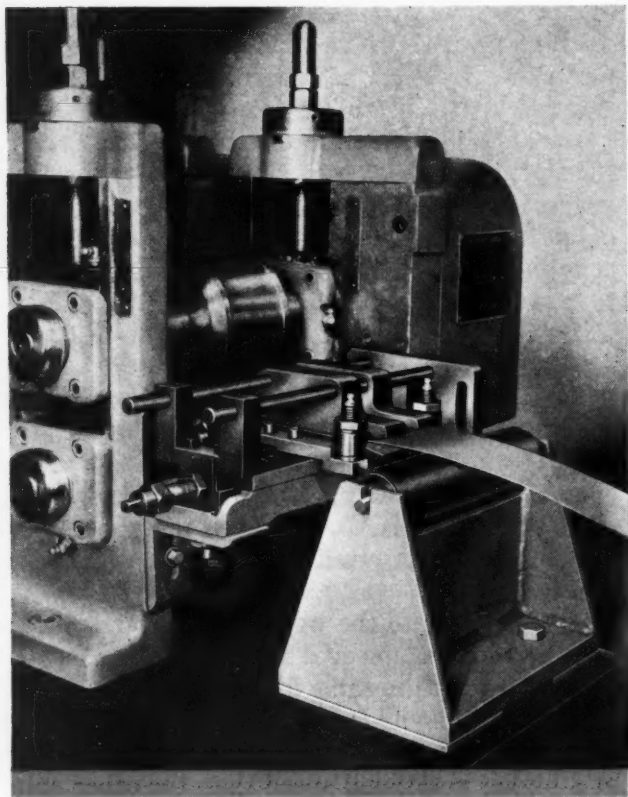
Starting Guides, Either of the Roll or Bar Type (the Latter being Shown in This Illustration) Guide Metal Strip into First Pair of Forming Rolls
